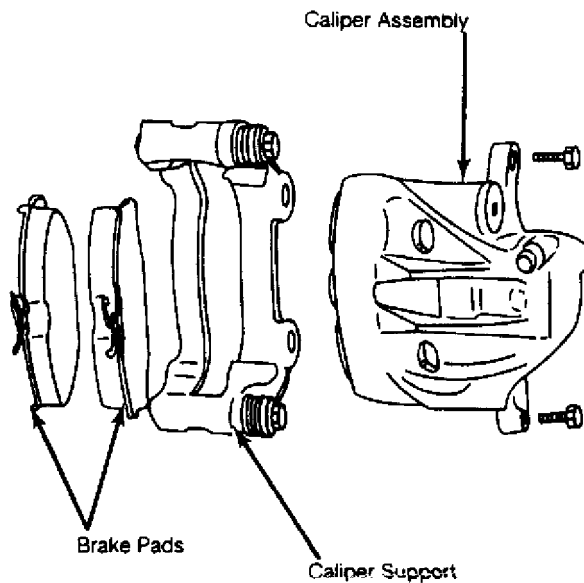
Exploded View of Front Caliper Assembly (Quantum & Vanagon Syncro)
